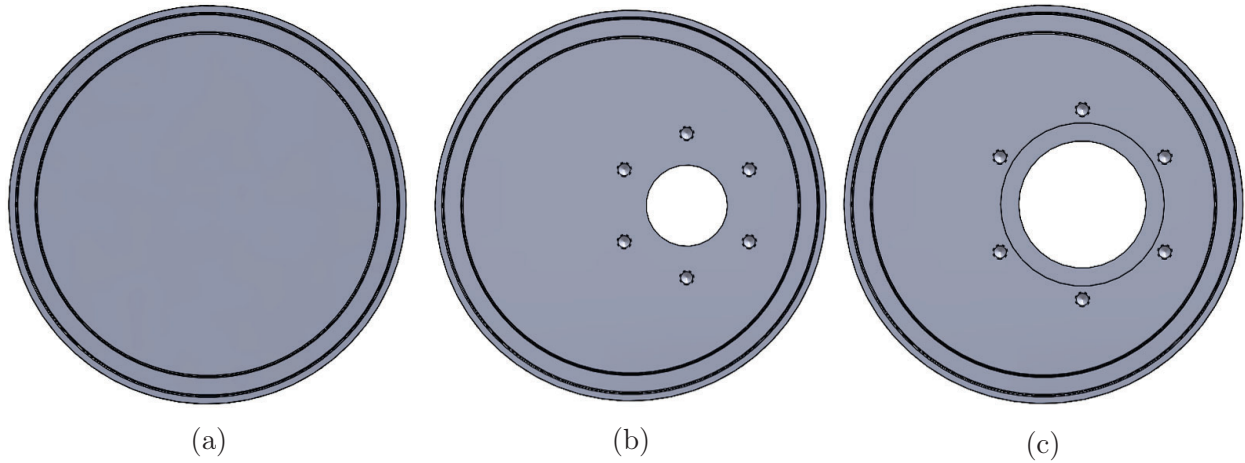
The three different blanks used in the system. (a) The first blank is just a standard blank used to seal the side of a standard drying module. (b) The second blank includes features for a standard bulkhead clamped connection to KF25 vacuum fittings. (c) The third blank includes a 52 mm diameter pocket and a 40 mm hole surrounded by the bolt pattern for KF40 bulkhead clamps used for mounting windows to the sides of the drying modules.
